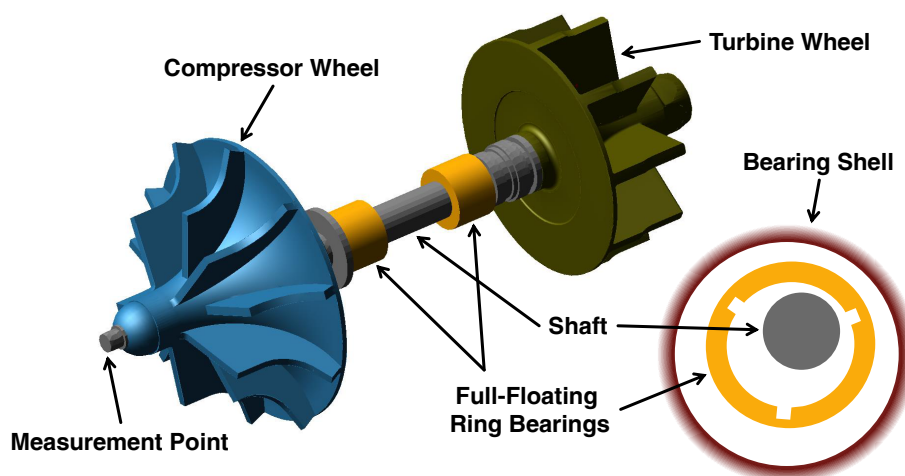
Turbocharger rotor with full-floating-ring bearings.
